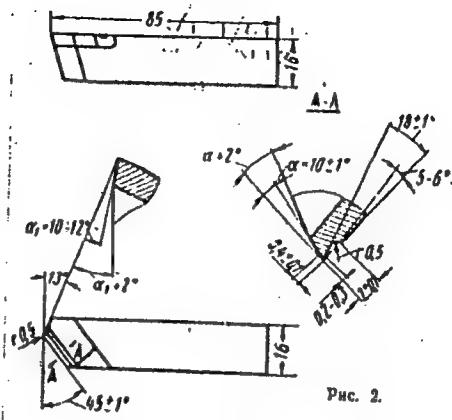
Geometrical parameters of straight cutters for machining 1Kh18N9T steel.
